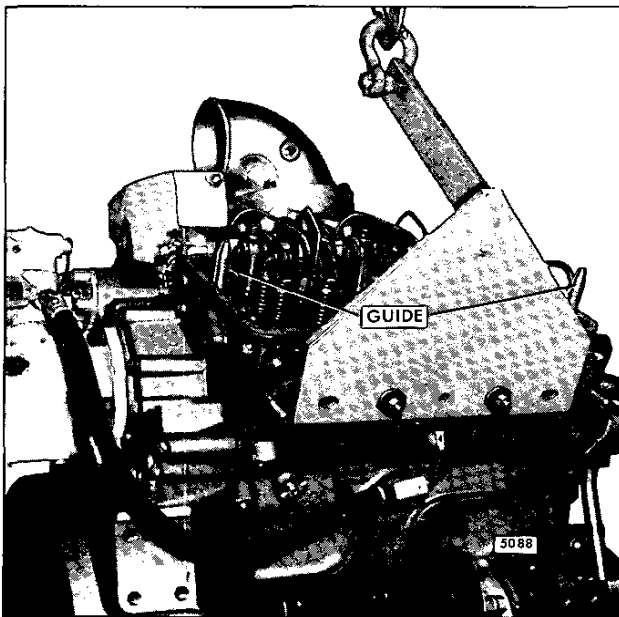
Lifting or Installing Cylinder Head with Tool J 22062-01
